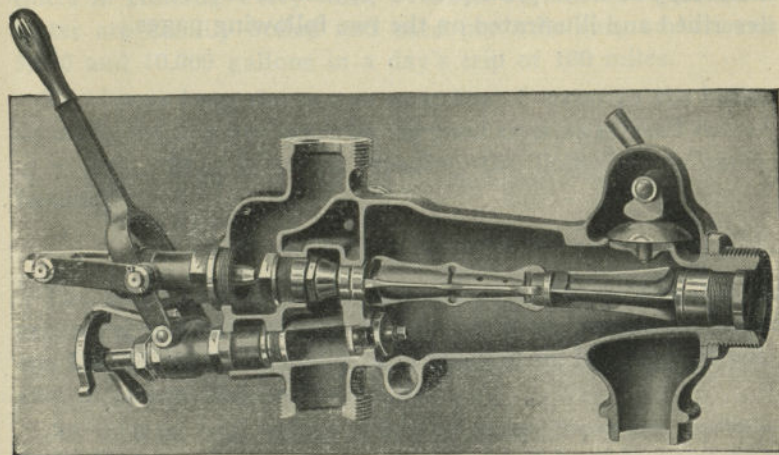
SECTIONAL VIEW OF INJECTOR.
